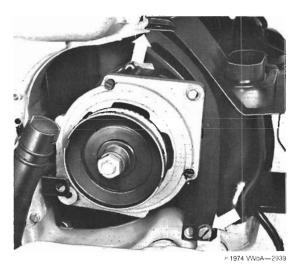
Screws that hold the alternator tensioning arm bracket.
